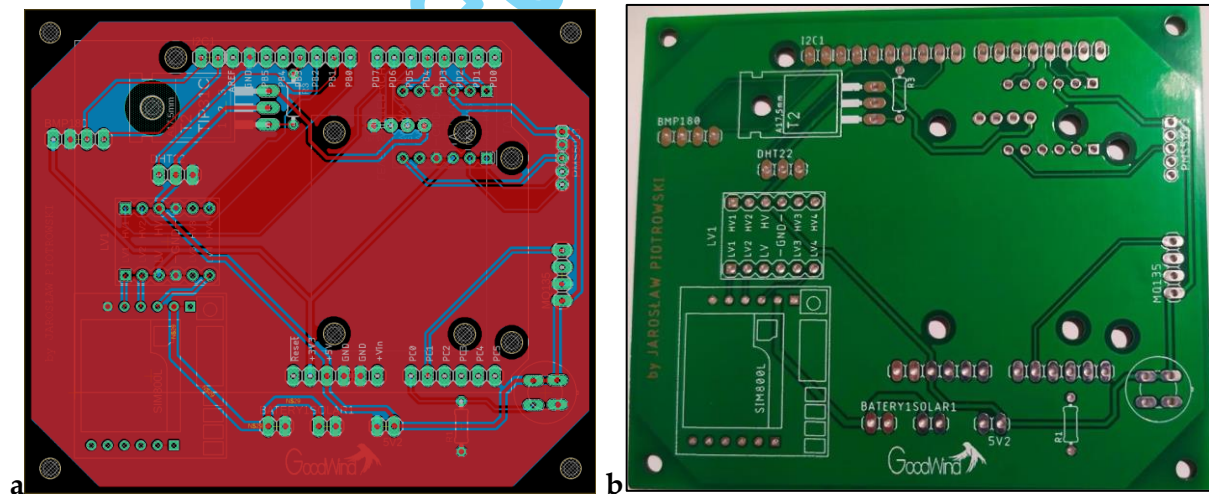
Project (a) and photo of the fabricated PCB (b) that implements the schematic presented in Fig. 2.
